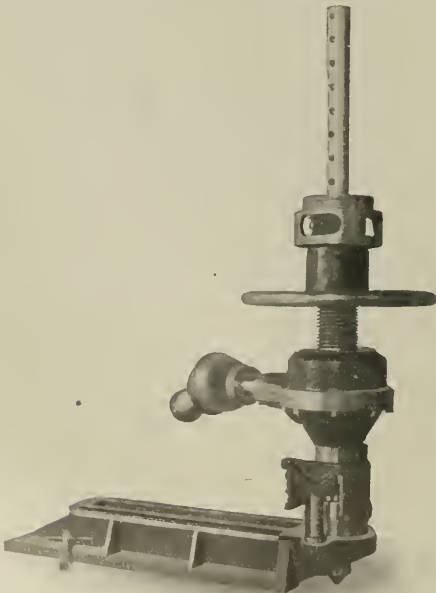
Drilling Spindle Clamped to Slotted Base and provided with Extensible Drill Spindle.
